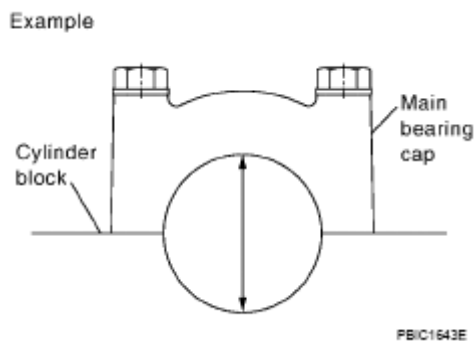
Identifying Main Bearing Cap And Cylinder Block
